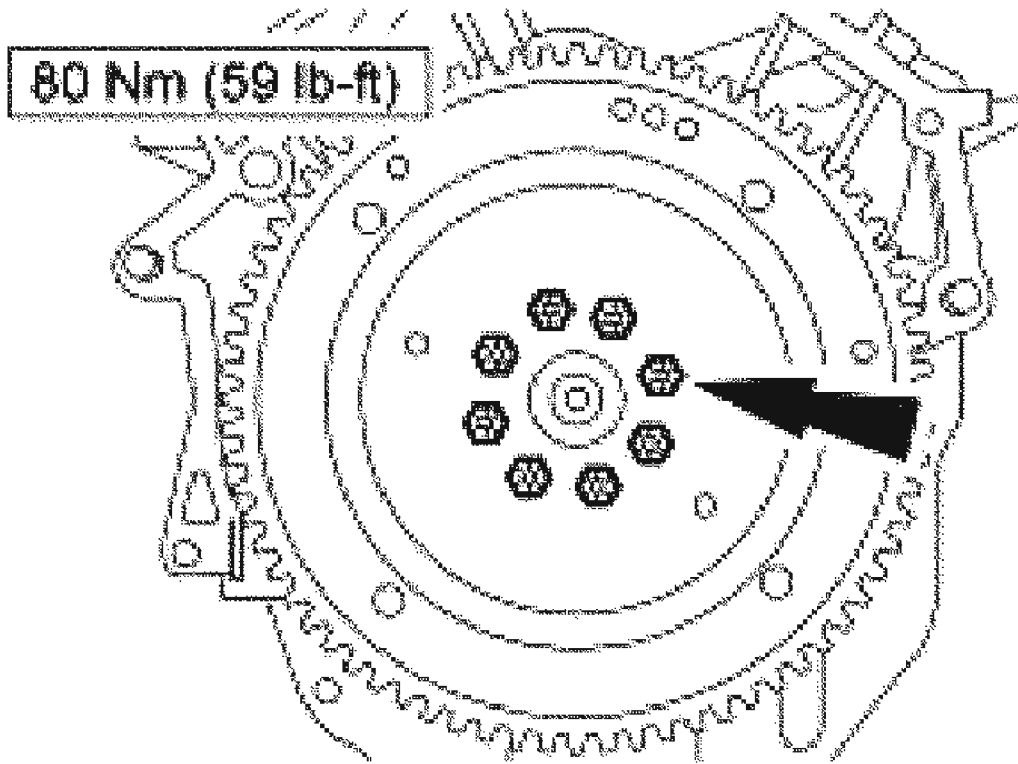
Identifying Bolt Tightening Sequence & Torque Specification
